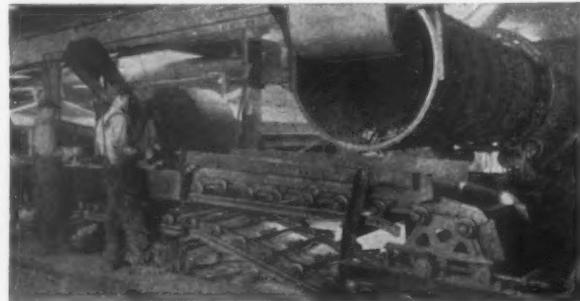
CASTINGS BEING DELIVERED FROM A ROTARY COOLER TO AN APRON CONVEYOR.
